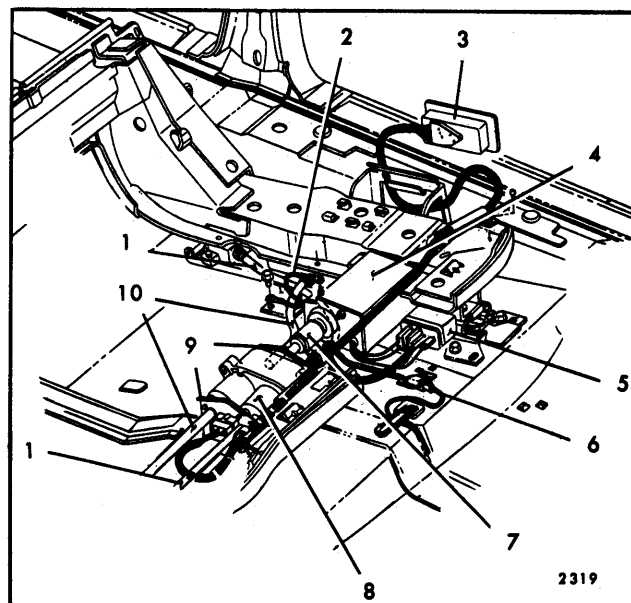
Four-Way Bench Seat Wiring - "B & C" Body Styles
